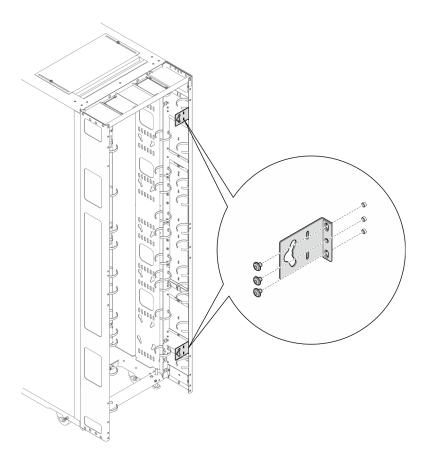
Installing the L-shaped bracket with the PDU facing the front of the rack cabinet
